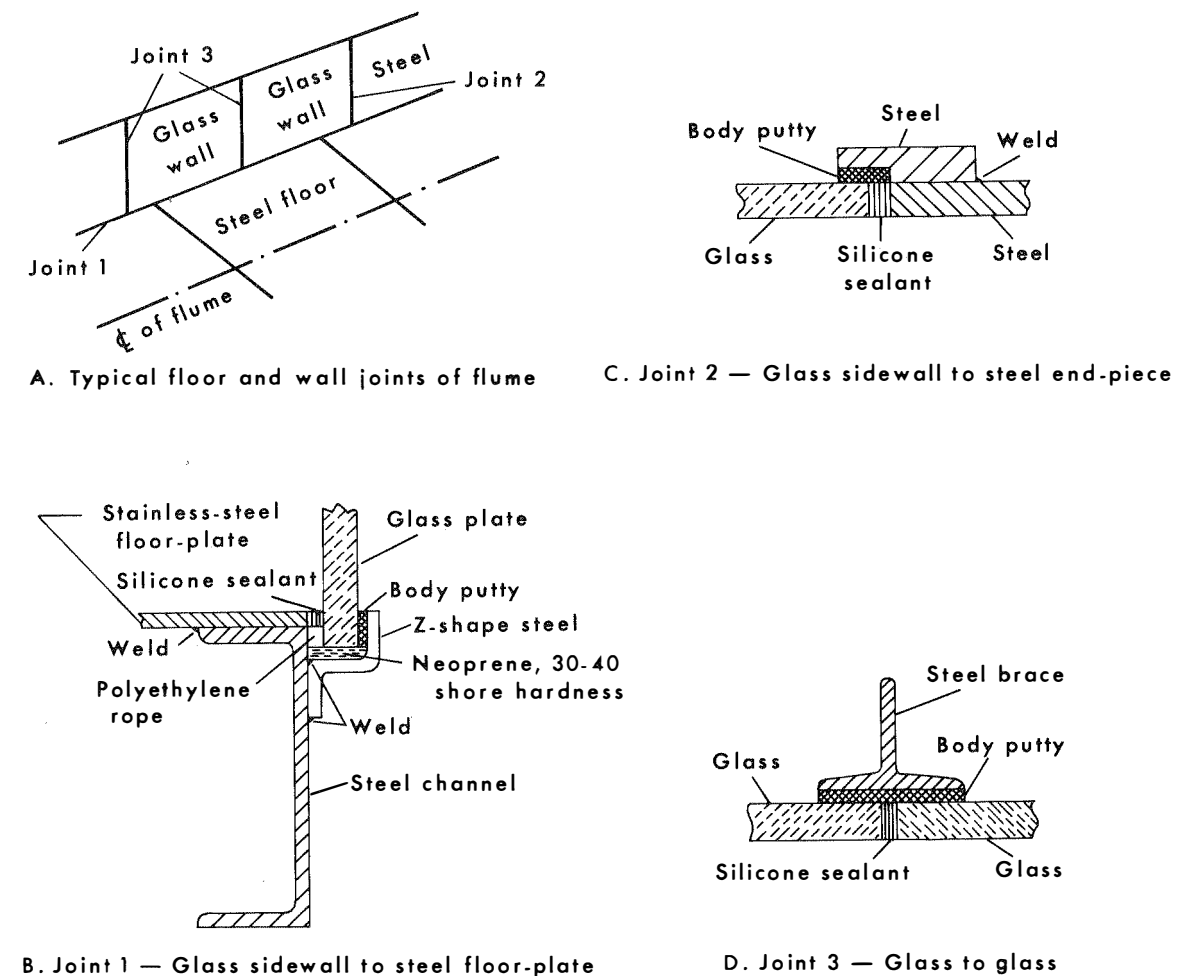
Mounting glass in flume sidewall (after Daly, 1965).
